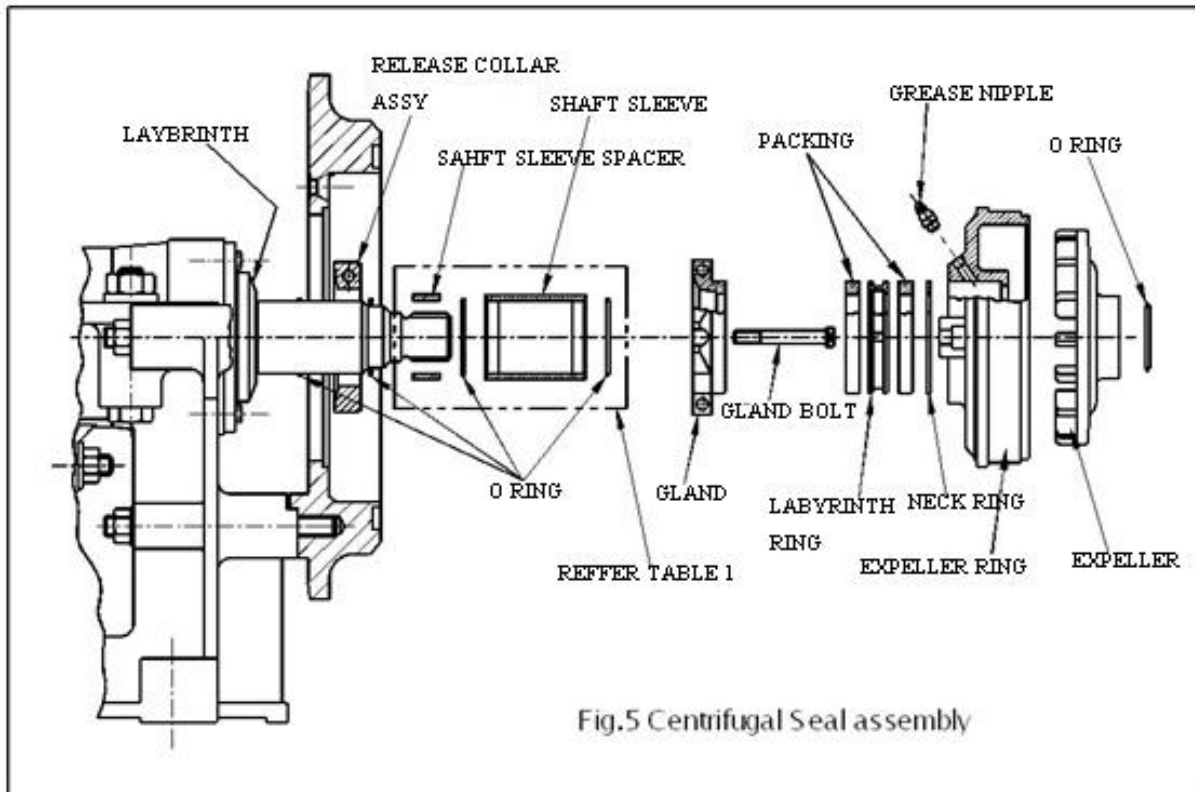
shows a typical assembly of shaft components, indicating the relative position of parts on the pump Shaft, which varies according to pump size. Table 1 lists shaft components for a gland sealed pump in the order in which are fitted to the Shaft, commencing at the end face of the LABYRINTH (062) on the pump end of the Bearing Assembly. Pumps with similar sets of Shaft components are grouped together in the Table. Generally, in centrifugally sealed pumps, the same sets of component parts apply as for gland sealed pumps, except for substituting the EXPELLER (028) for the SHAFT SPACER (117). Exceptions to the general case are listed in Table 2.
